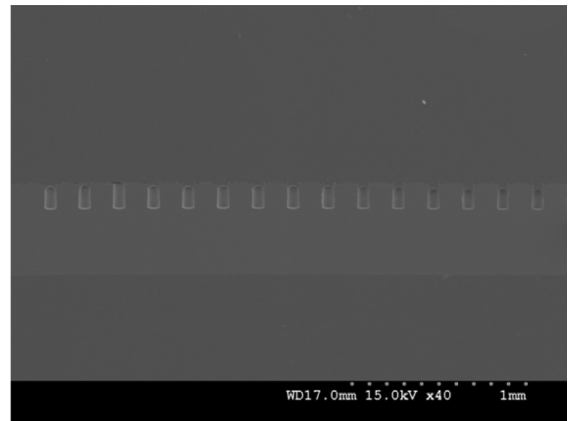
Typical TSV process and solder bumping for 3D packaging.
